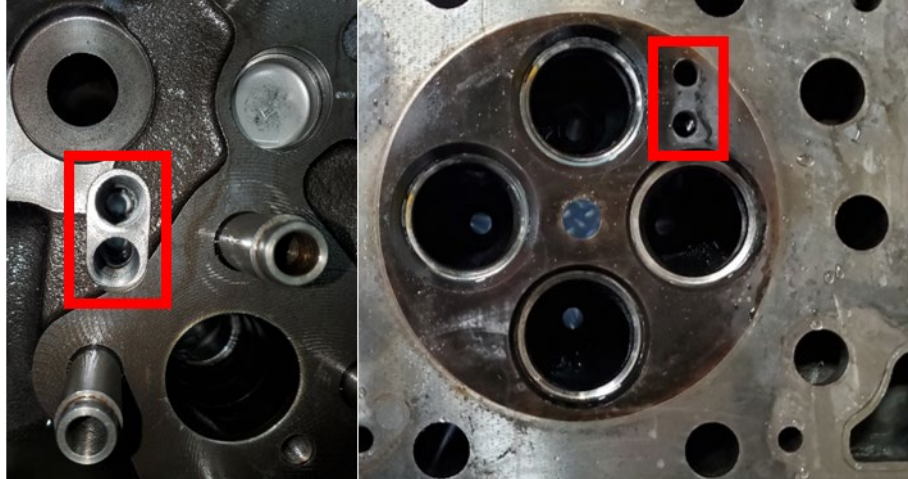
Top and Bottom View of Cylinder 6 Combustion Chamber Head Machining
